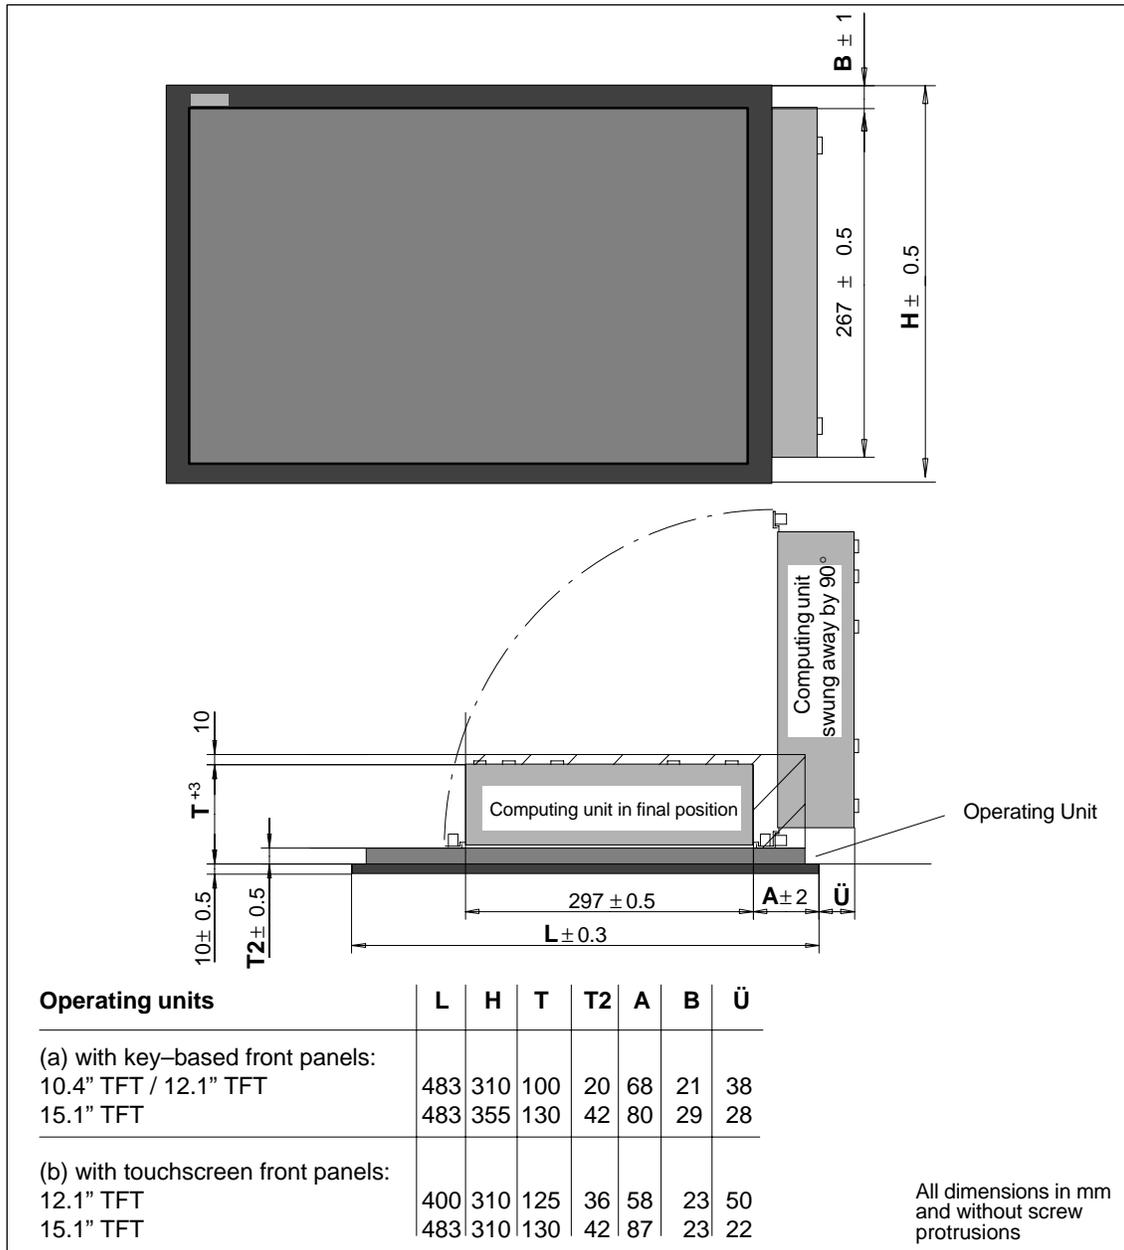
Device dimensions Panel PC 670 in standard mount form factor without a CD-ROM drive
